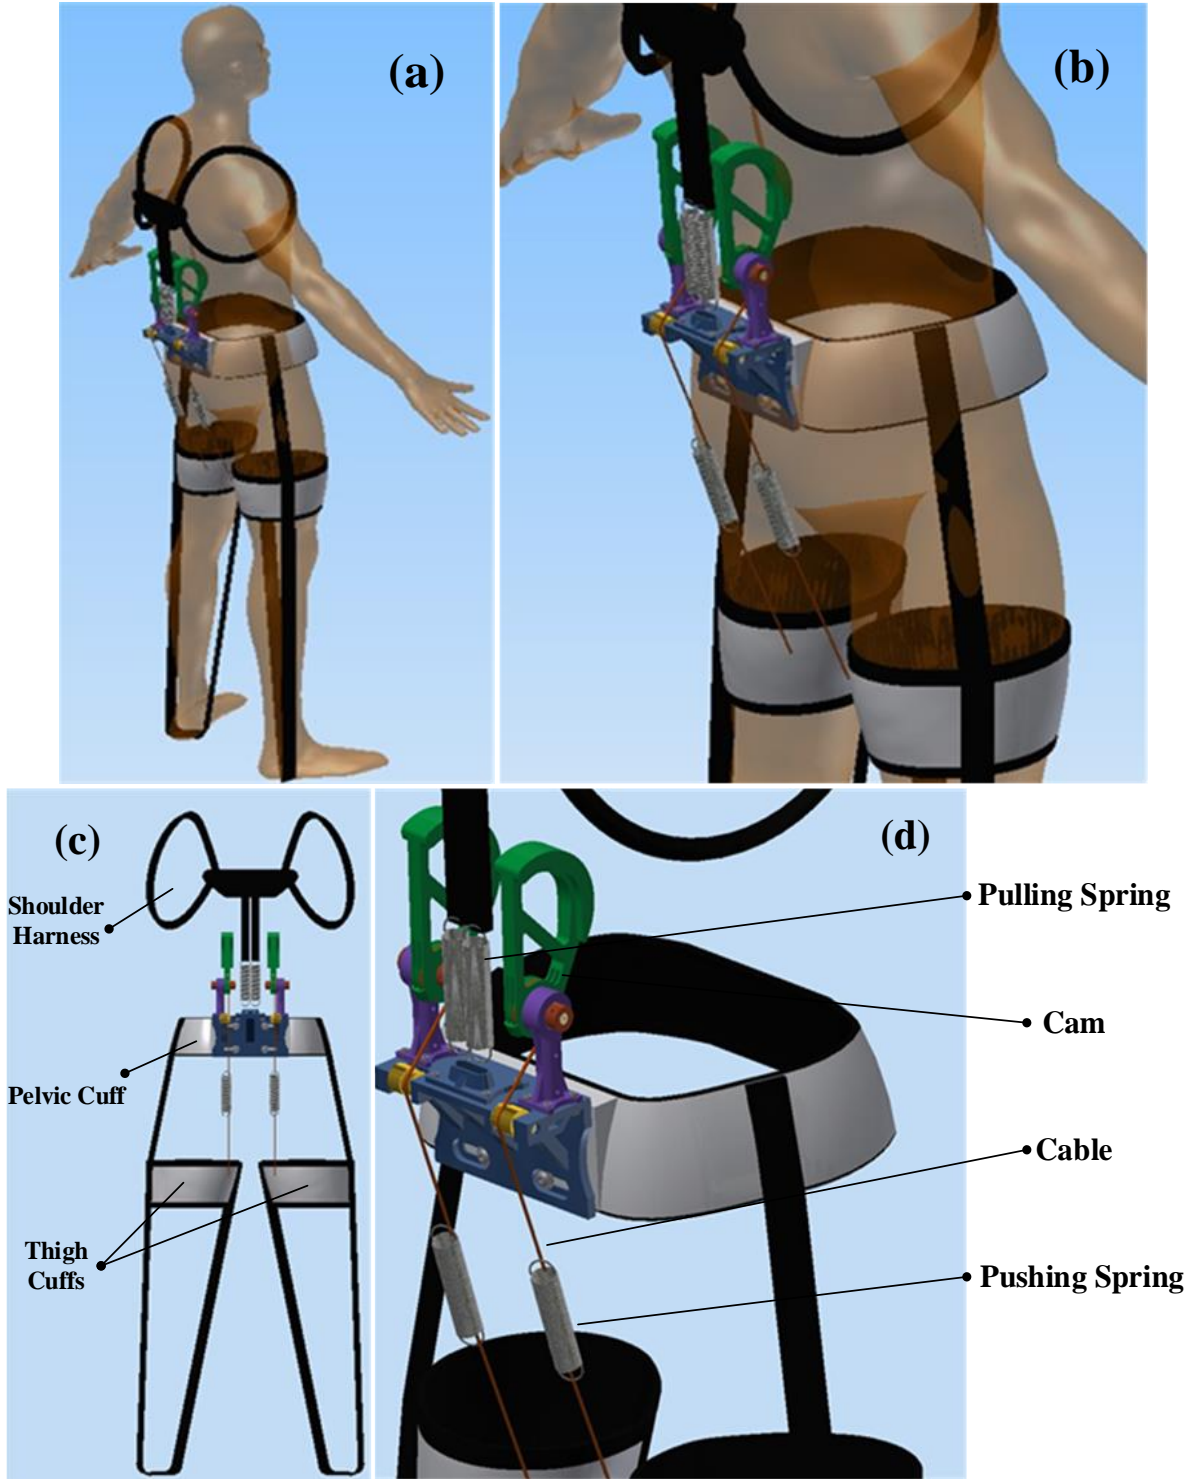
3D physical model for passive exoskeleton spine suit: (a) view of wearing on user; (b) view zoomed in of wearing on user; (c) back view of the suit; (d) mechanism details.
